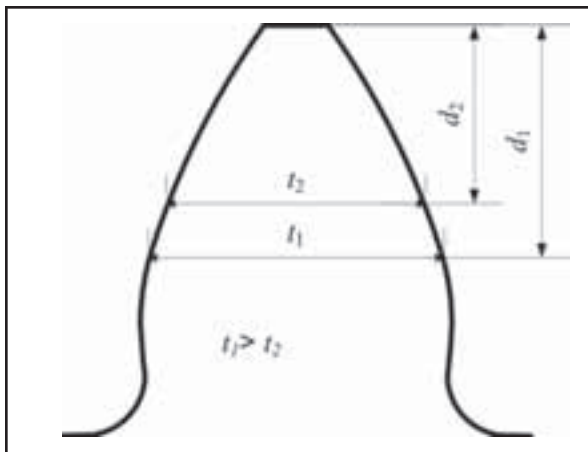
Spur and helical gears have significant tooth thickness taper only in the tooth depth direction.
